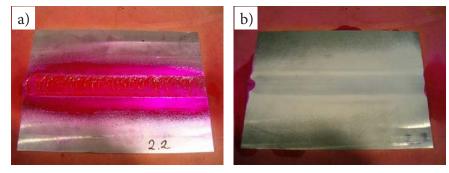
Examples of penetrant inspection of FSW joints conducted at Instytut Spawalnictwa, a leaktightness test, a) a view from the side of a weld face with a penetrant applied, b) a view from the side of a weld root after applying developer
